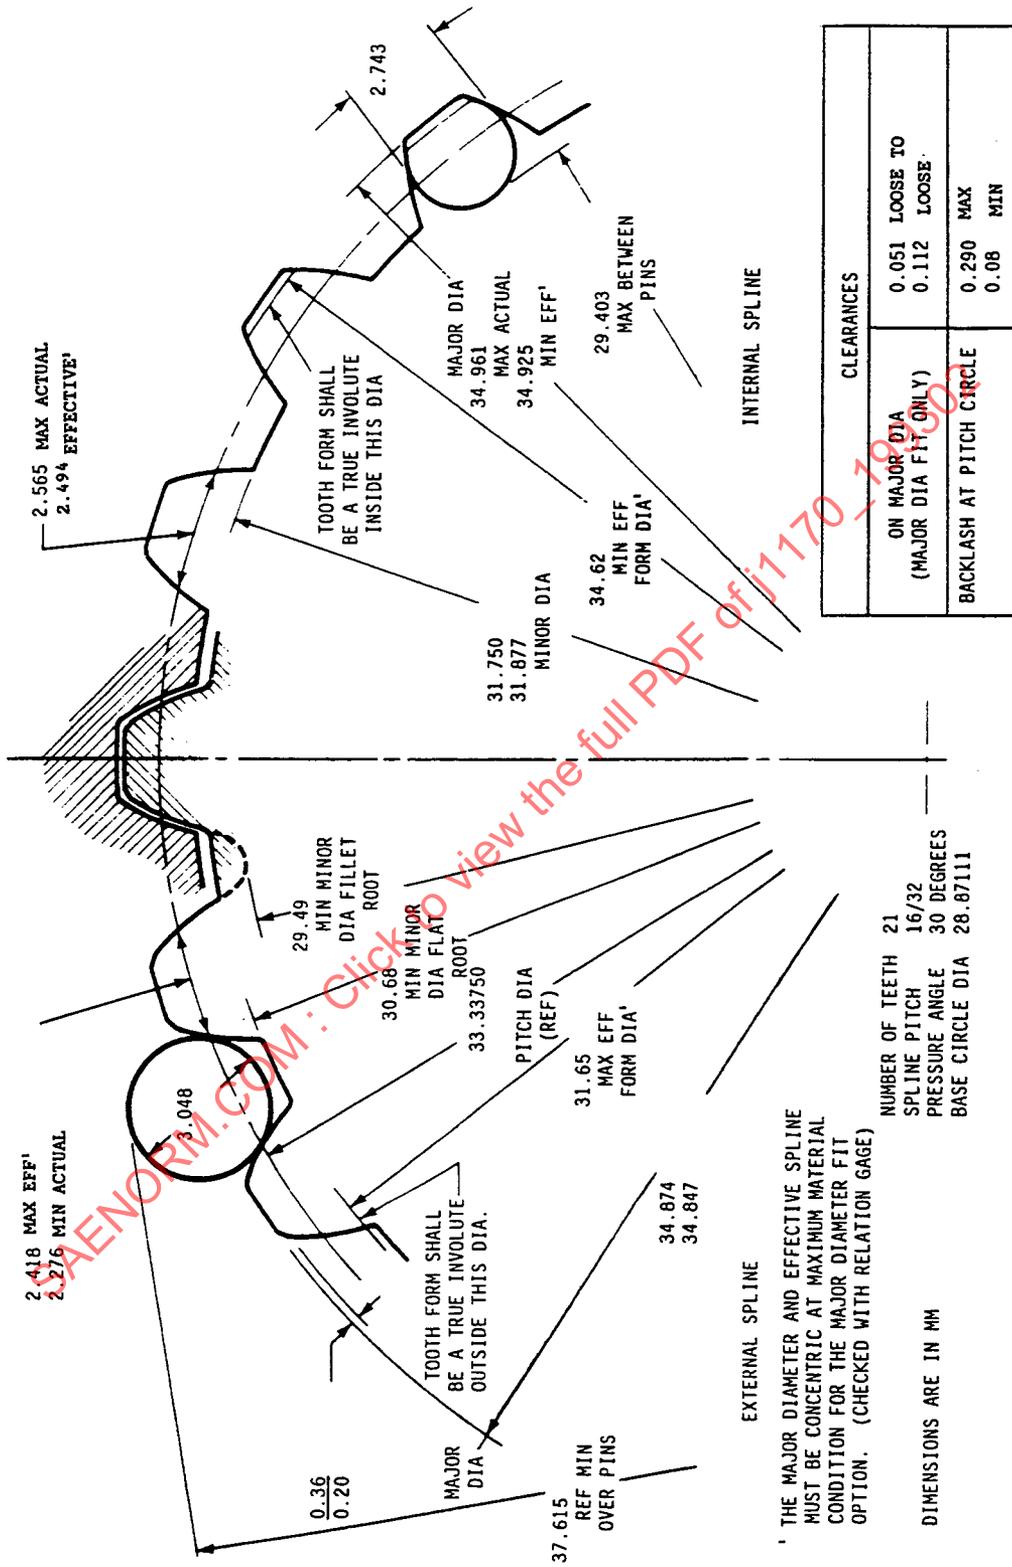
TYPE II 1000 rpm POWER TAKE-OFF (35 mm DIAMETER) INVOLUTE SPLINE DIMENSIONS FRONT AND REAR POWER TAKE-OFF FOR AGRICULTURAL TRACTORS
